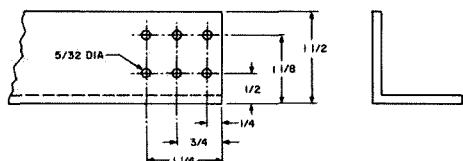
Drill guide dimensions. Make this tool from stock left over from the center support and side arms.
